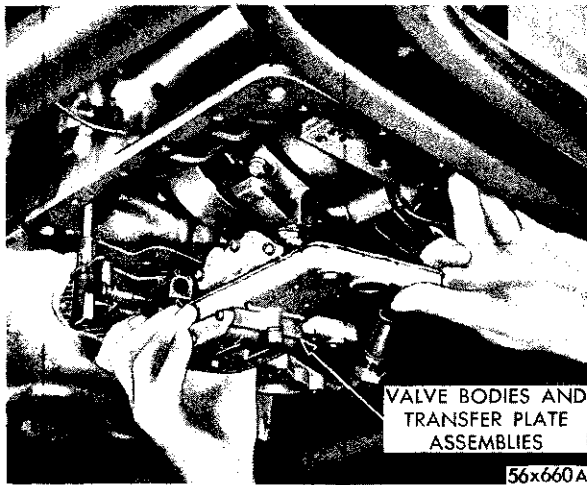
Removal and Installation of Valve Bodies and Transfer Plate Assembly
